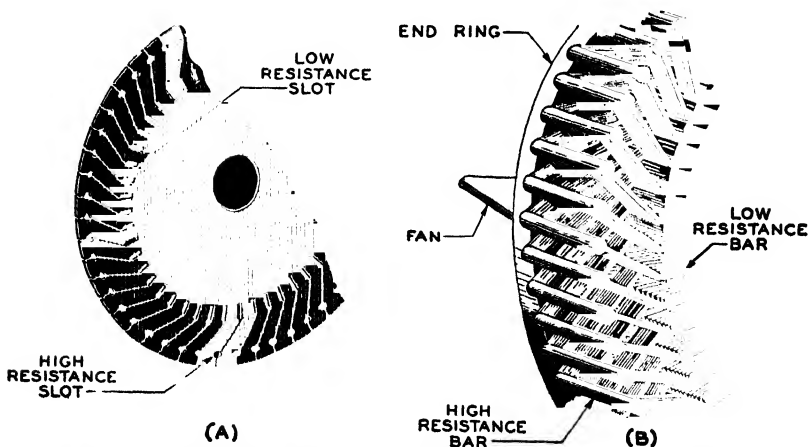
Double Squirrel Cage Rotor Winding At (A) Is a View of Rotor Discs, and (B) Shows Rotor-Windings with Core Removed
